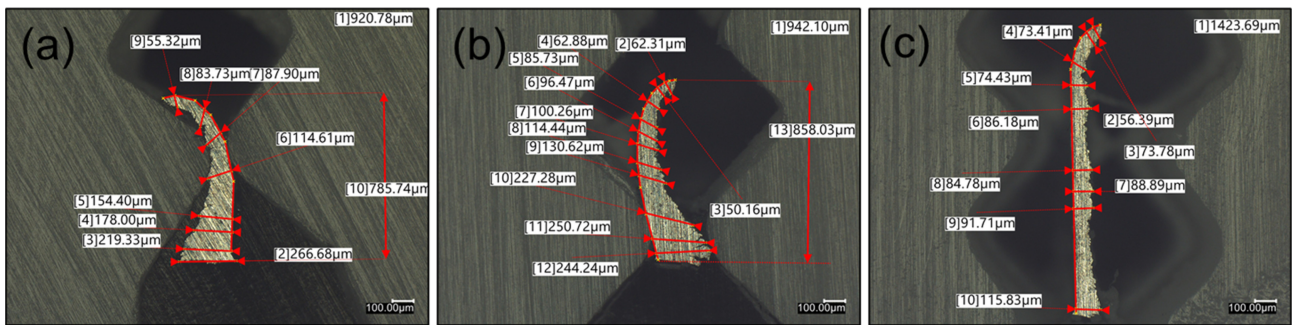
Chip morphologies of Ta-W alloy machined with different tool's rake angles; (a) 10°, (b) 15°, and (c) 20°
